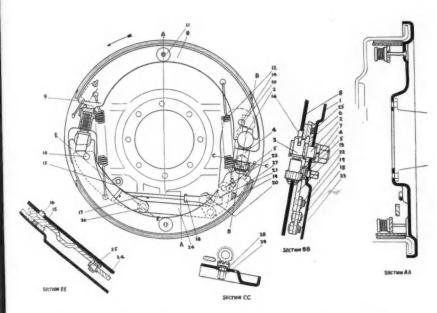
Bendix mechanically-actuated Twinplex brake. I, backing plate; 2, anchor pin; 3, plunger passing through anchor pin; 4, adjusting nut on plunger; 5, socket in plunger; 6, reinforcement plate; 7, washer; 8, brake shoe; 9, heel end of brake shoe; 10, toe end of brake shoe; 11, hold-down spring assembly; 12, return springs; 13, 15, cams; 14, 16, pivot points of cams on shoes; 17, brake cable; 18, cable fitting; 19, equalizer; 20, hook on equalizer; 24, strut; 25, antirattling springs
